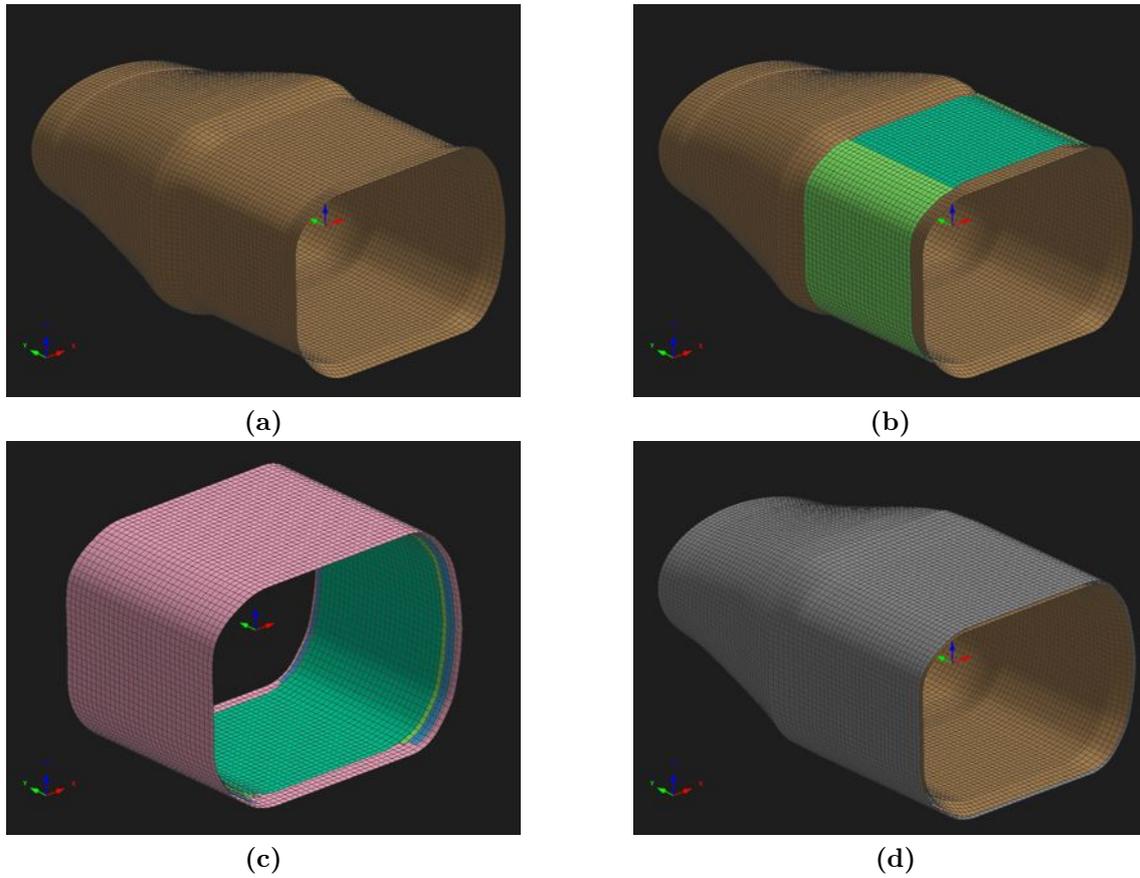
Model assembly of the component, (a) interior skin, (b) interior skin with UD filler arrangements, (c) UD filler sets, (d) assembled component.
